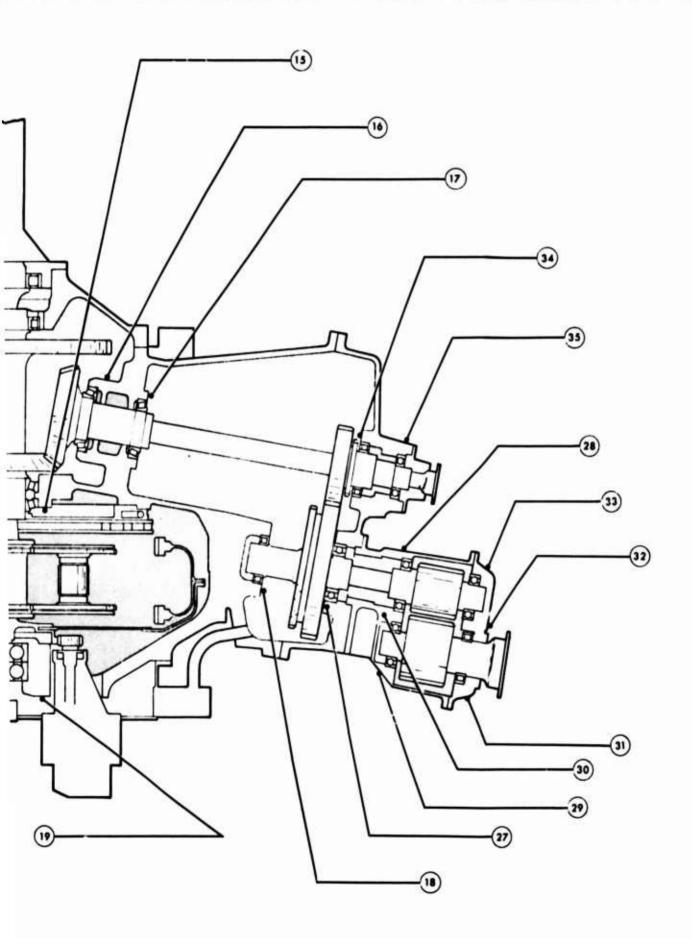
Thermocouple Locations - Roller Gear Transmission.
